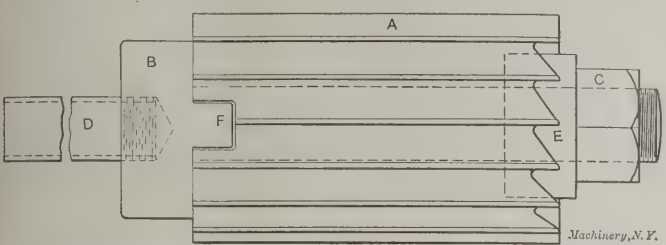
Mandrel and Handle with Hollow Mill Mounted for Hardening.
